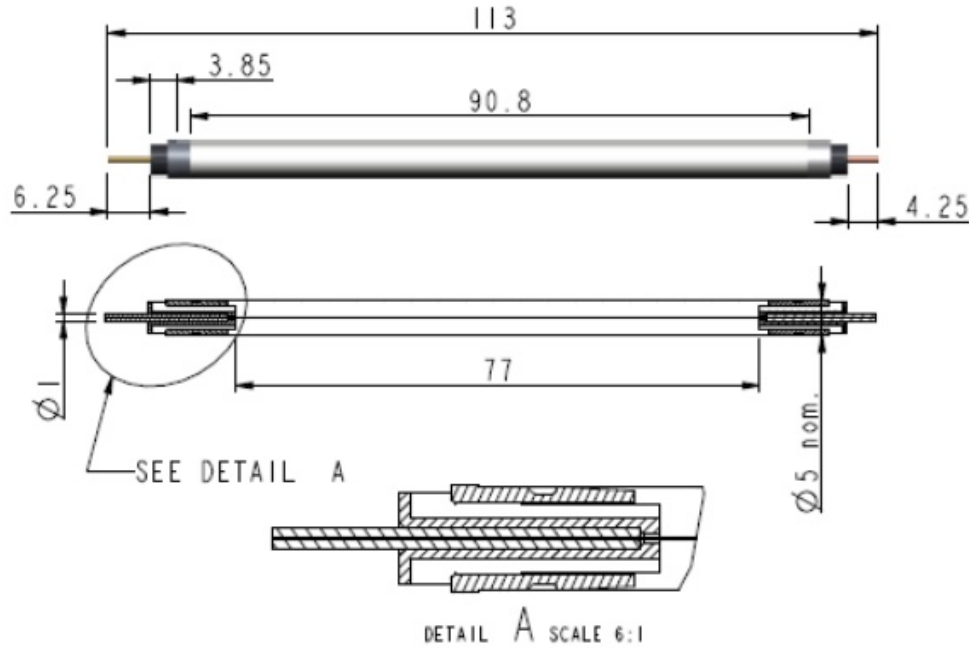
A Schematic showing the dimensions of a straw tube Ref. [12]
